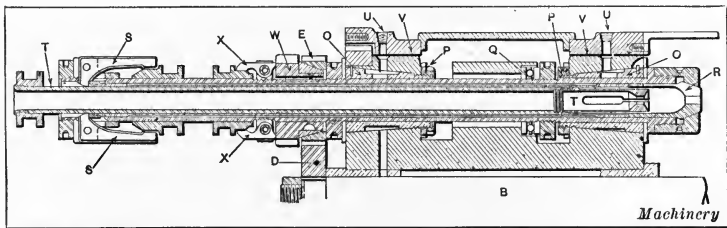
Cross-sectional View of One of the Six Spindles of New Britain Automatic Screw Machine
